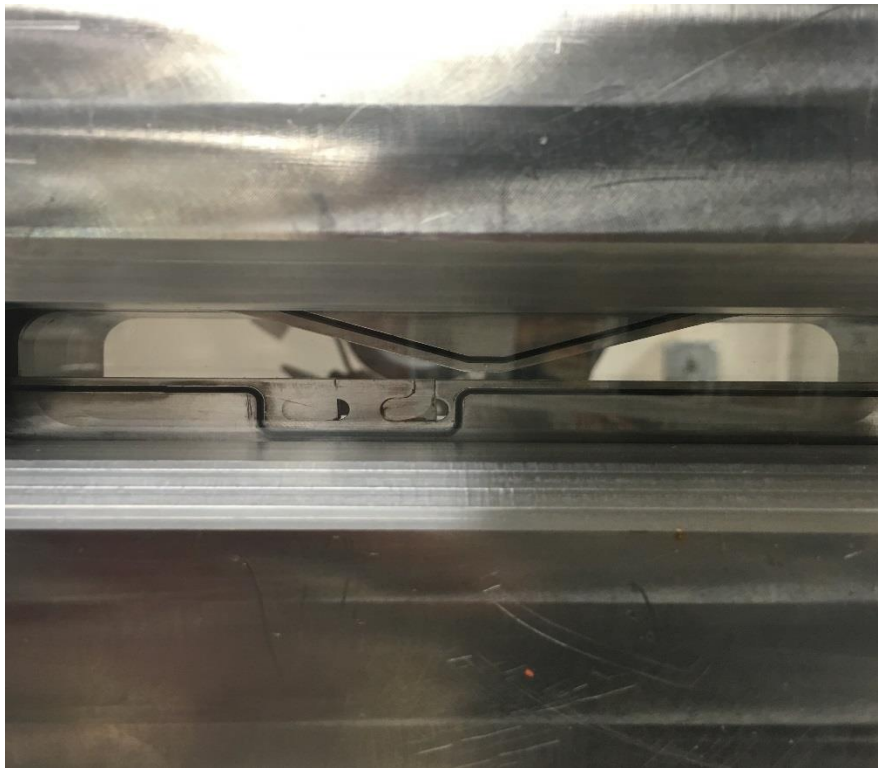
A photograph of the assembled section partially showing one of the installed O-rings between walls of the C-D profile and the sapphire window.
